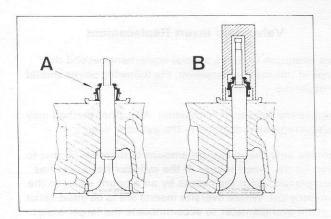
Fitting Inlet Valve Stem Seals on Naturally
